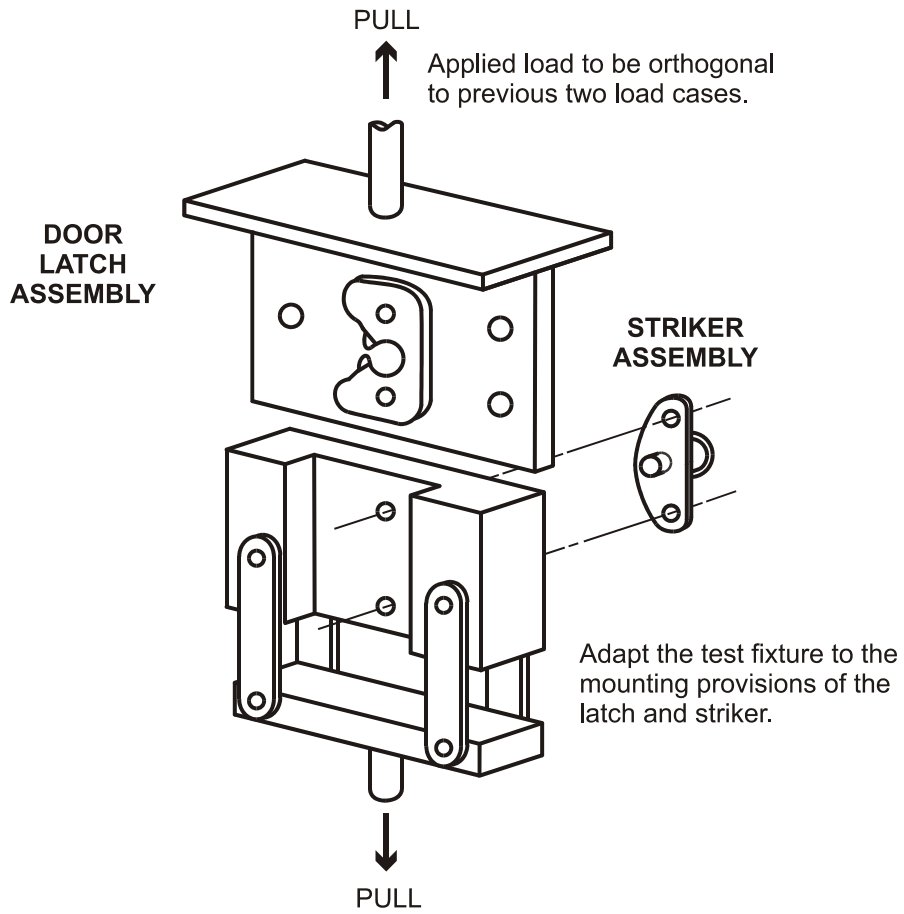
Door Latch: Tensile Testing Fixture for Load Test 2
